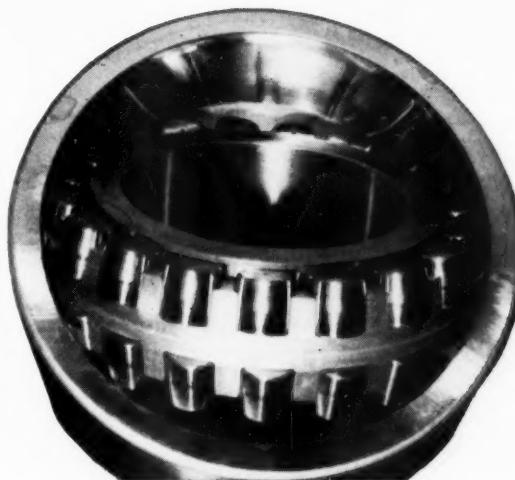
Bearing just as Removed from Paper Machine After 12 Month Service Using a Detergent Type Oil.
